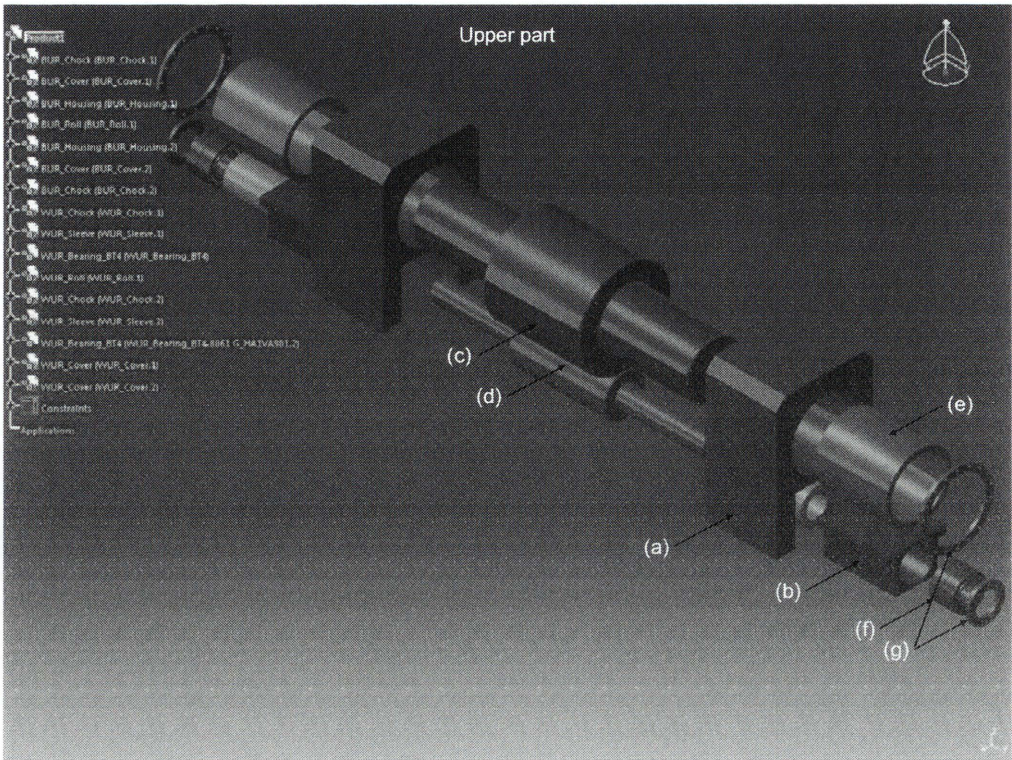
Assembly of the upper part of a rolling stand: (a) backup roll bearing housing chock, (b) work roll bearing housing chock, (c) backup roll, (d) work roll, (e) journal bearing, (f) tapered roller bearing, (g) gasket (cover)
